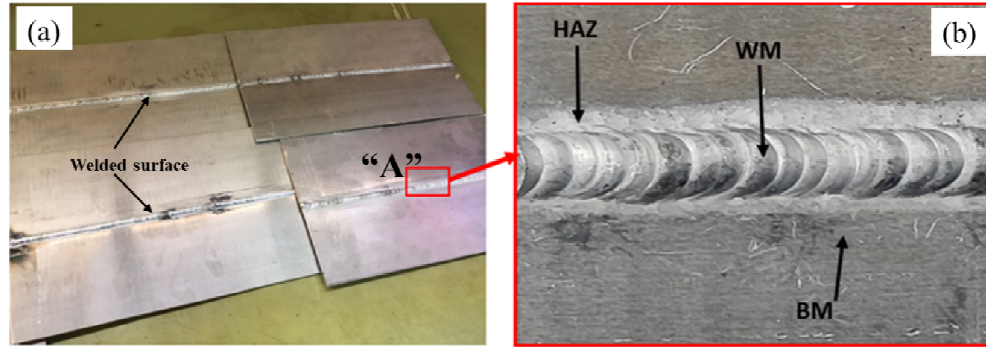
(a) Aluminum 6061 plate welded using the TIG method, and (b) Enlarged the “A” area.
